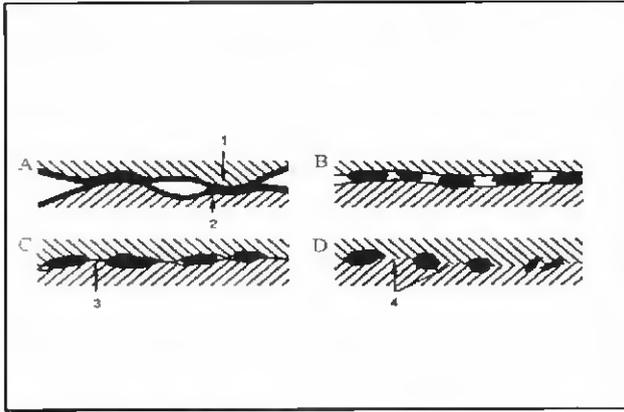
Four stages of transverse welding by Akeret.
